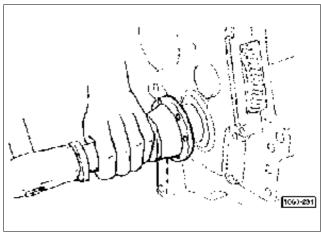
Using a suitable plug fit the pulley hub to the crankshaft;
